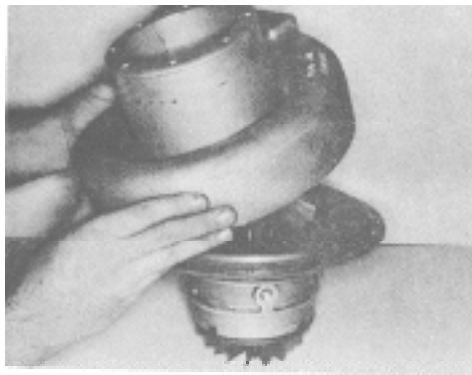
, T-542. Installing oil seal/diffuser plate and bearing housing assembly in collector housing
